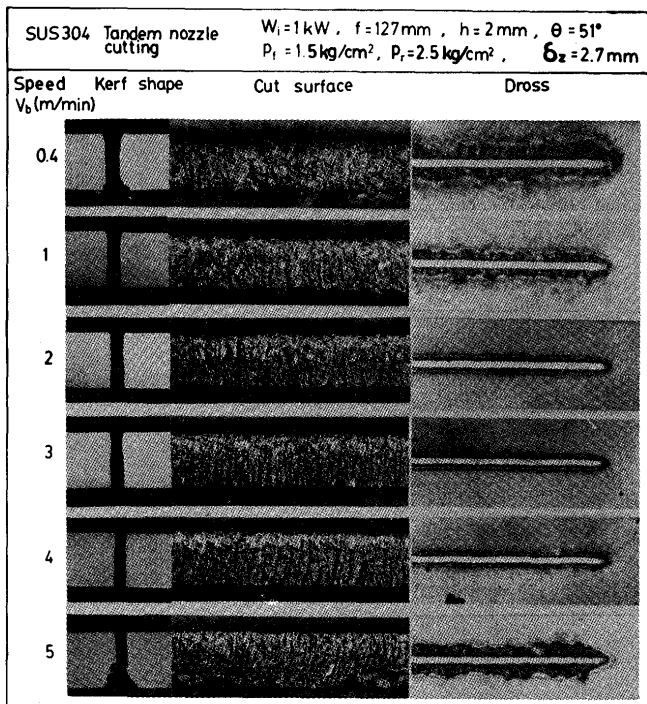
Cut appearances by tandem nozzle cutting of stainless steels.
